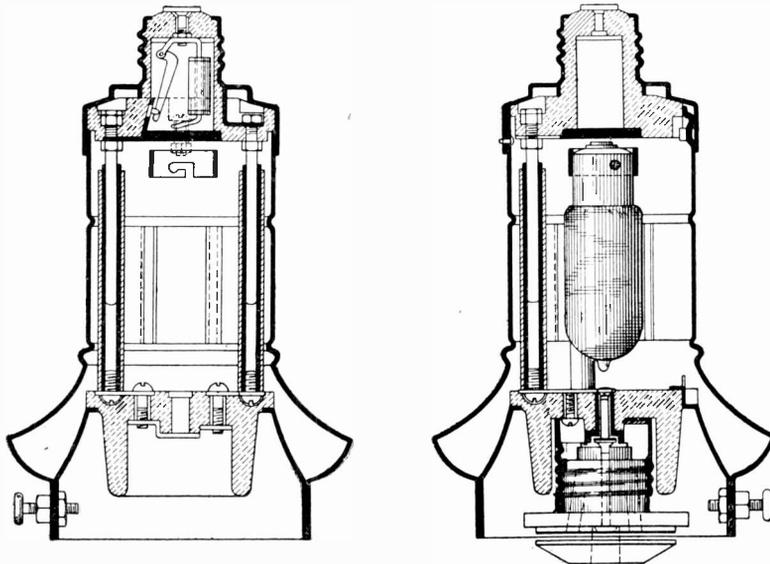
Sectional Views of Single-Glower Westinghouse Nernst Lamp.
